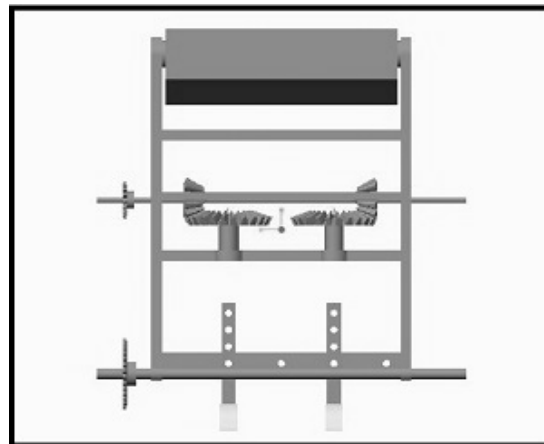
Top View- Design of Seed sowing cum Fertilizer machine
